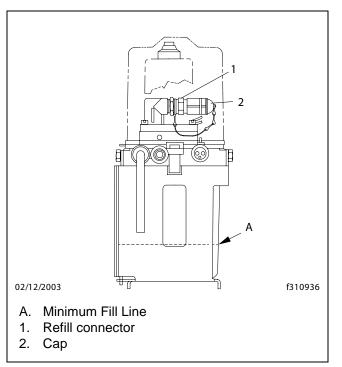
Vogel Chassis Lubrication Pump Assembly
